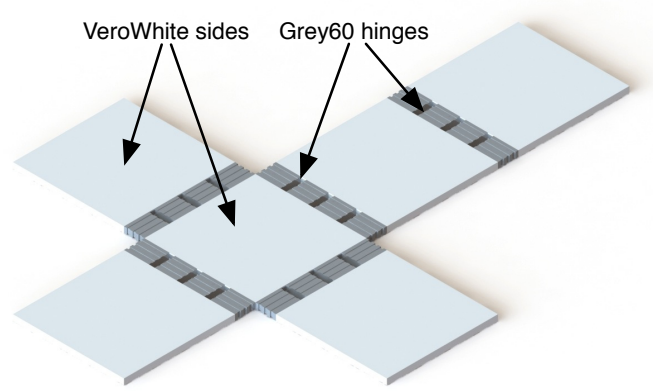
Rendering of the flat configuration of the folding package used for 3D printing.
